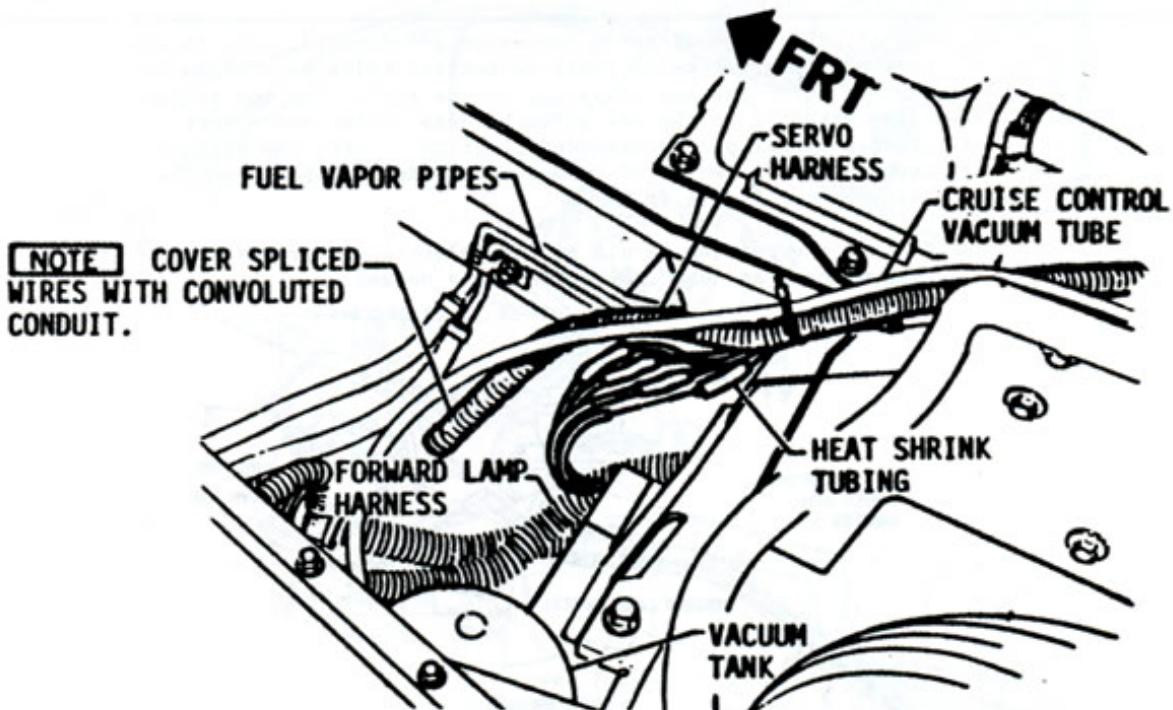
JUMPER WIRE HARNESS SPLICE
